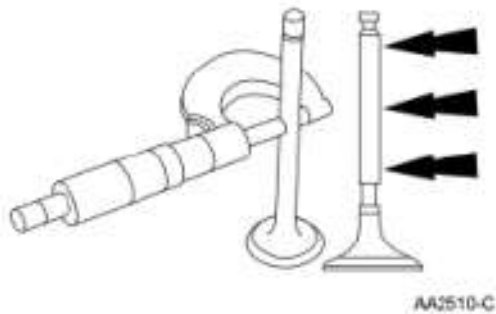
Measuring Diameter Of Each Intake And Exhaust Valve Stem
